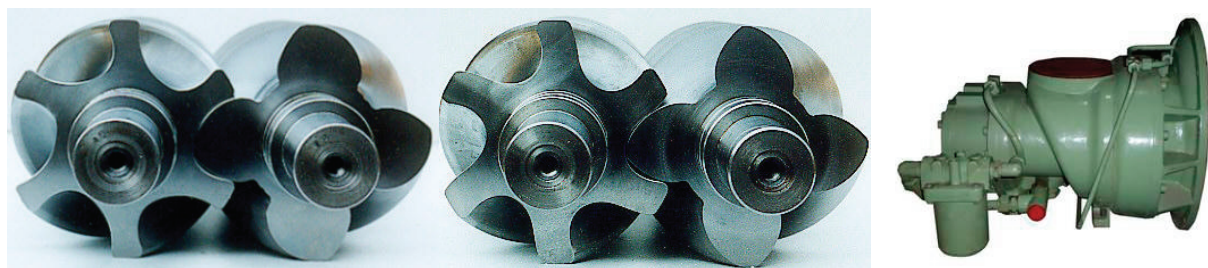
Rotor retrofit in oil-flooded screw compressors, old rotors left, new rotors, right, Stosic et al, 2000
